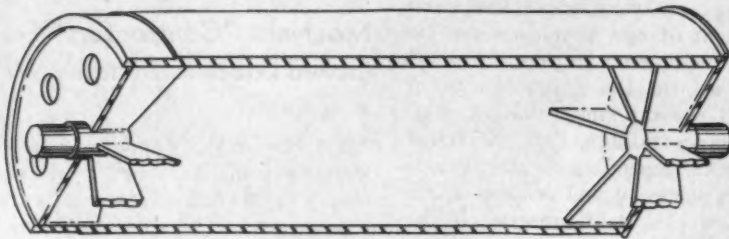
Alternate design in welded steel of drum in Fig. 14, showing "stub shafts" welded as integral part of drum and machined with O.D. grooving.
